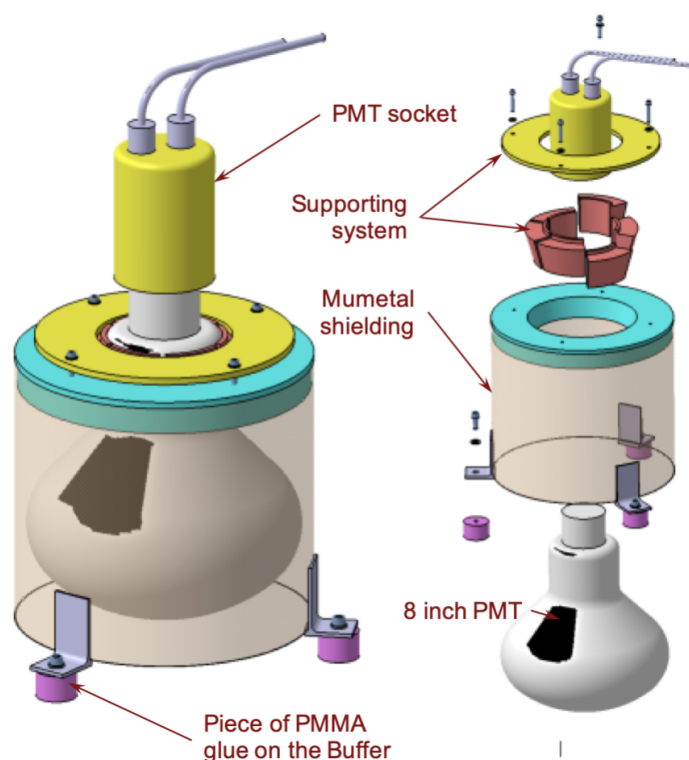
PMT assembly in its mu-metal magnetic shielding
